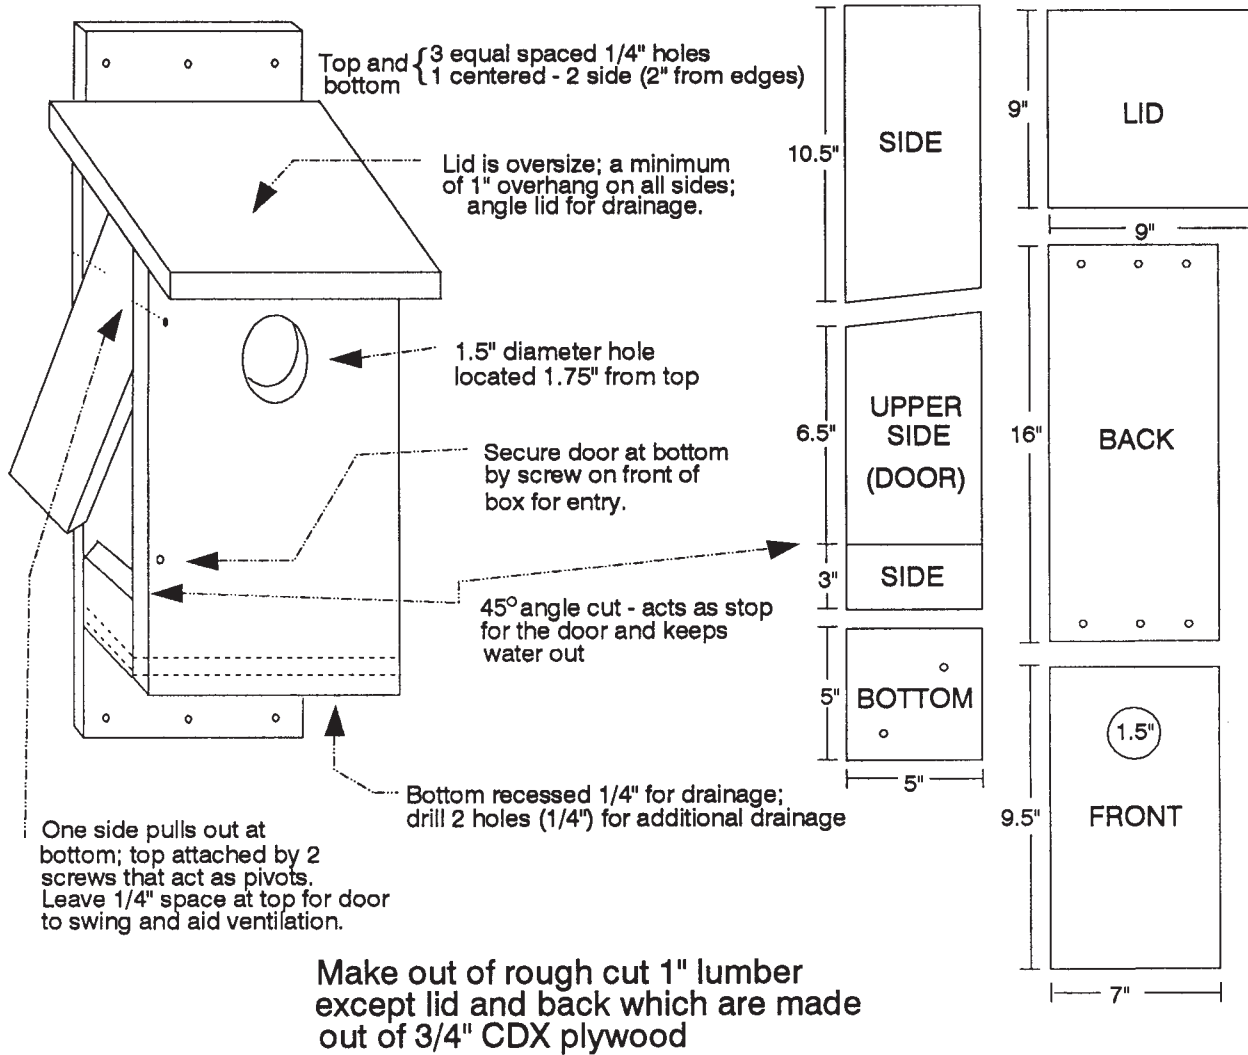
Bluebird nesting box construction plan with dimensions and description of door mechanism. Entrance should face south to southeast, away from prevailing winds and storms. Boxes can be attached to fenceposts, small trees, or poles at preferred heights of 5 ft (1.5 m) or higher.
